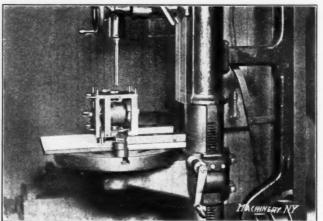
Jig in which Wrist-pin Holes are Reamed
